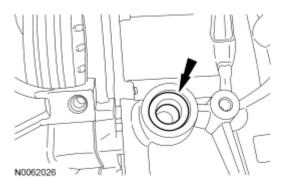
Identifying Transmission Fluid Cooler Tube Seal Courtesy of FORD MOTOR CO.
